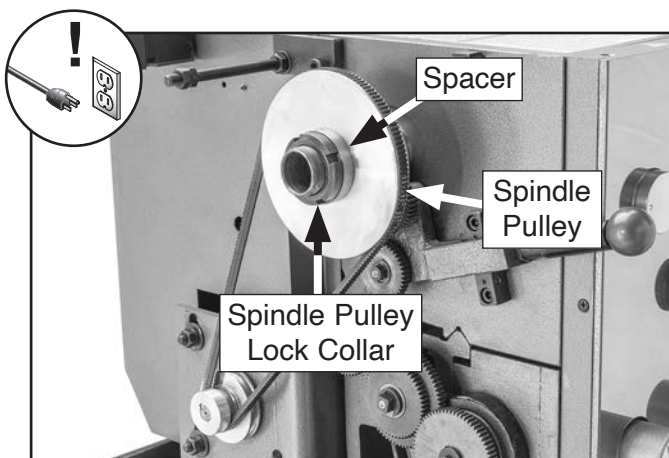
Location of spindle pulley and spindle pulley lock collar.
